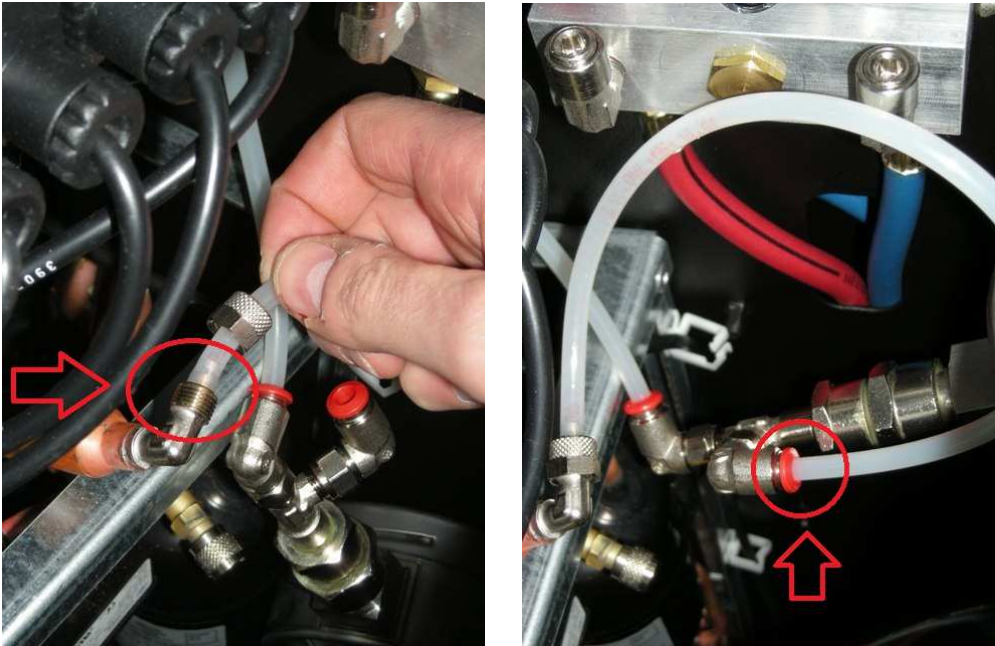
Connection of a segment of silicone tube between the inlet of the mechanic filter (left picture) and the outlet of the vacuum gauge (right picture)
